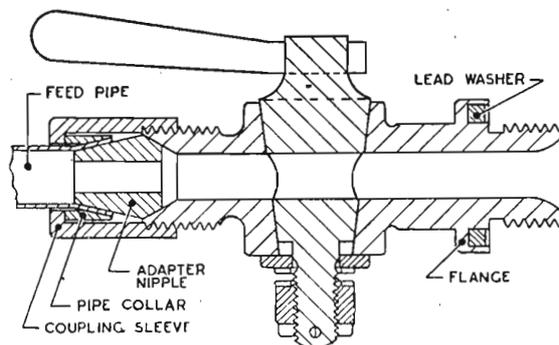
Stopcock, drum, storage, Mk. I, with coupling to feed pipe
